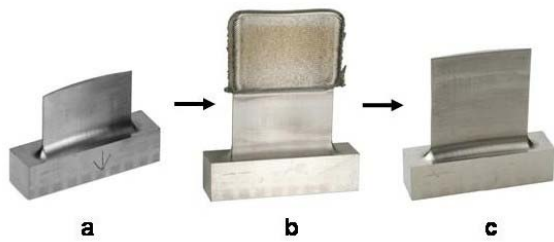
Representation of the manufacture of a\f*-specimens. The photo on the left (a) shows a milled 2D specimen before laser cladding. The photo in the middle (b) shows a laser clad 2D specimen after thermal stress relieving. The photo on the right (c) shows a laser clad specimen after milling and manual post-processing.
